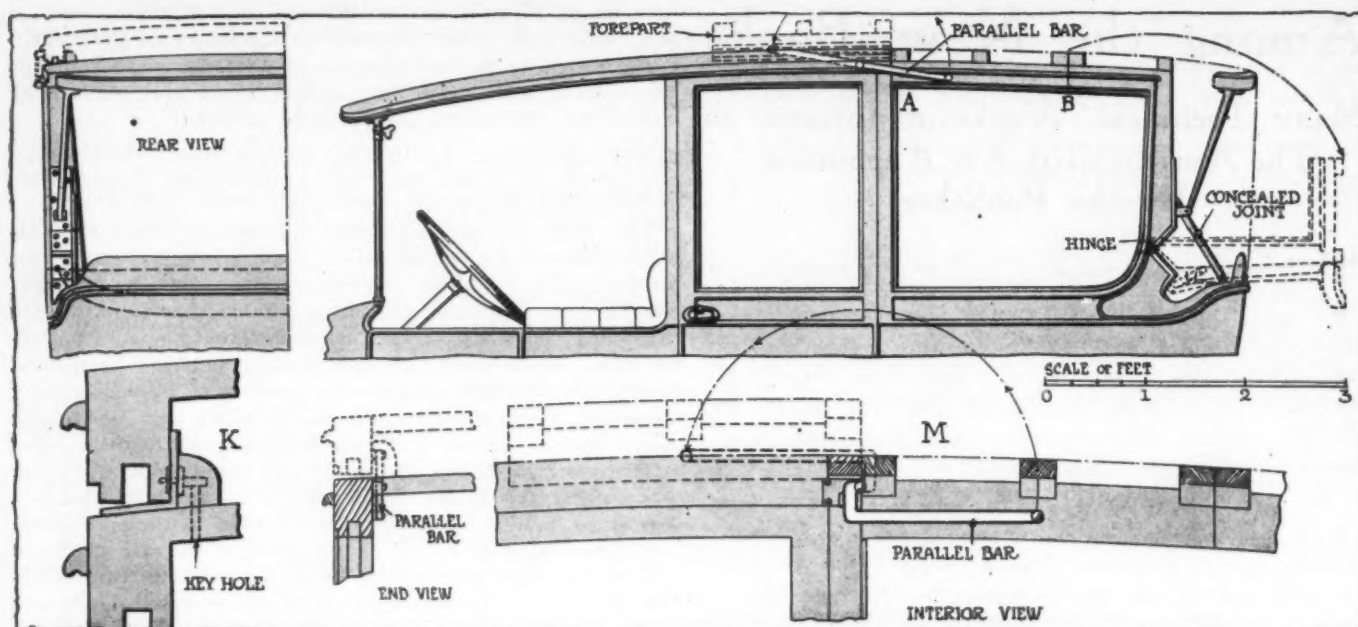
Scale drawings of folding top for limousine-landaulet, showing also alternative method of fitting parallel bars to the top section
